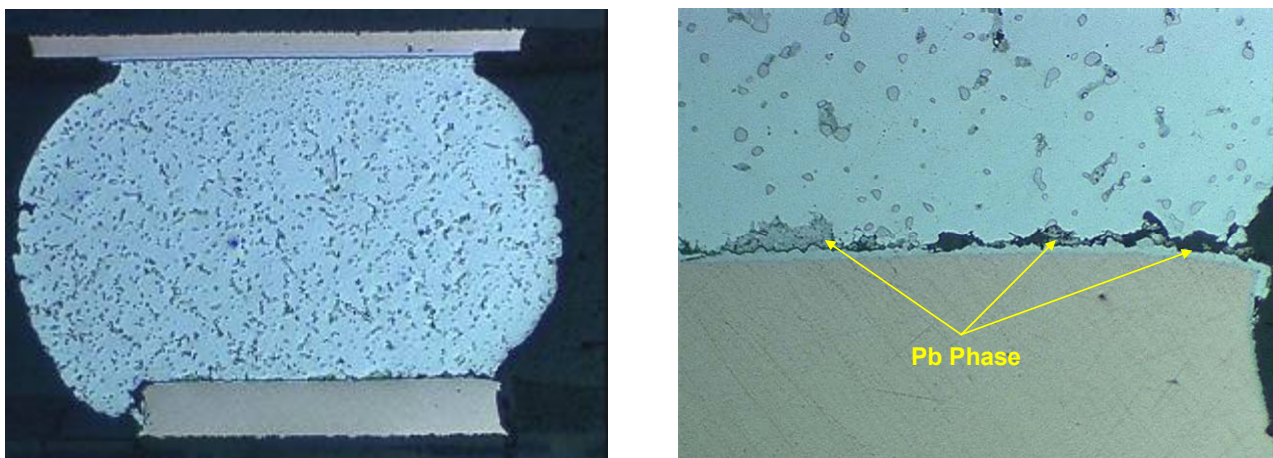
(left) BGA-225 SAC-SAC solder joint; (right) magnified view of crack with Pb phase present
